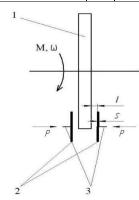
Schematic diagram of the disk-type brake system of mobile drilling rigs 1 – brake disc; 2 – brake pads thickness S; 3 – drive rod The diagnostic system provides control of a number of operation parameters of the main brakes of the drawwork.
